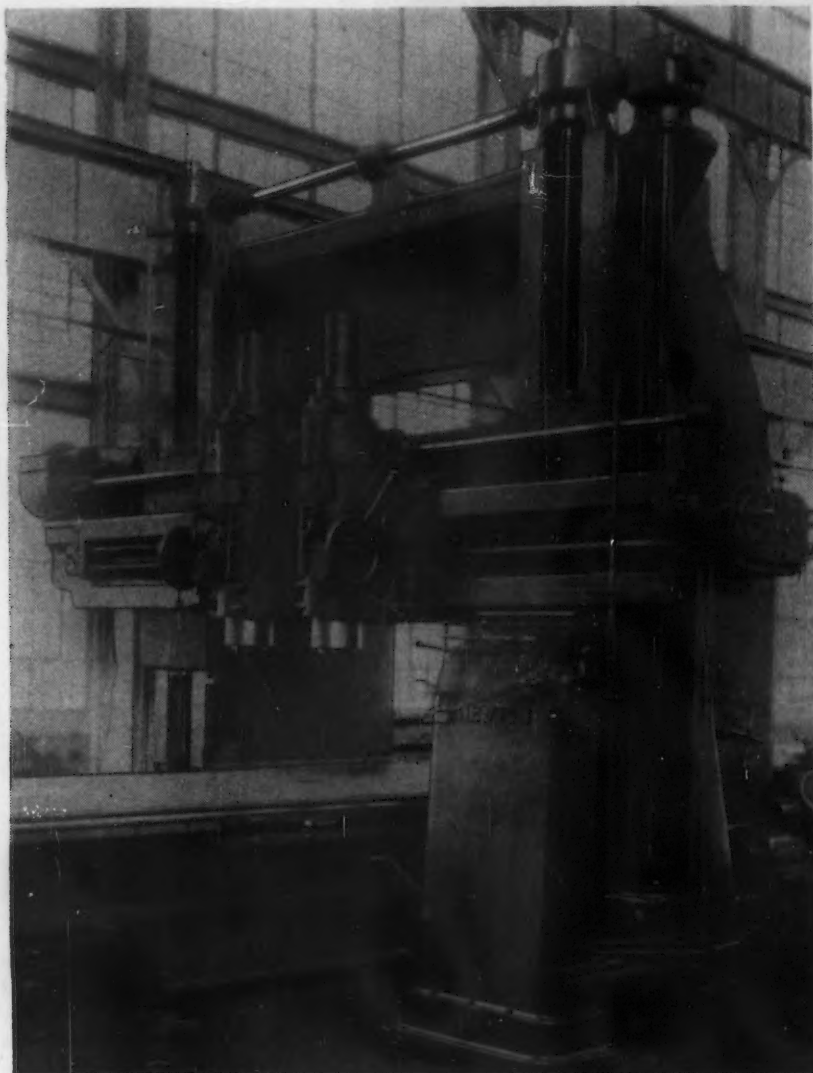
Newton planer-type milling machine equipped with two rail heads.
